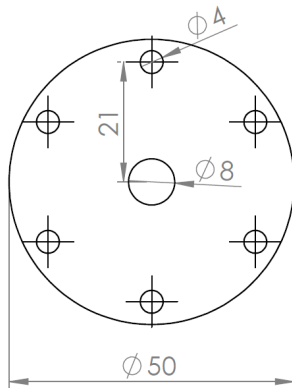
Drawing of the inside shield (6 mm acrylic sheet).
